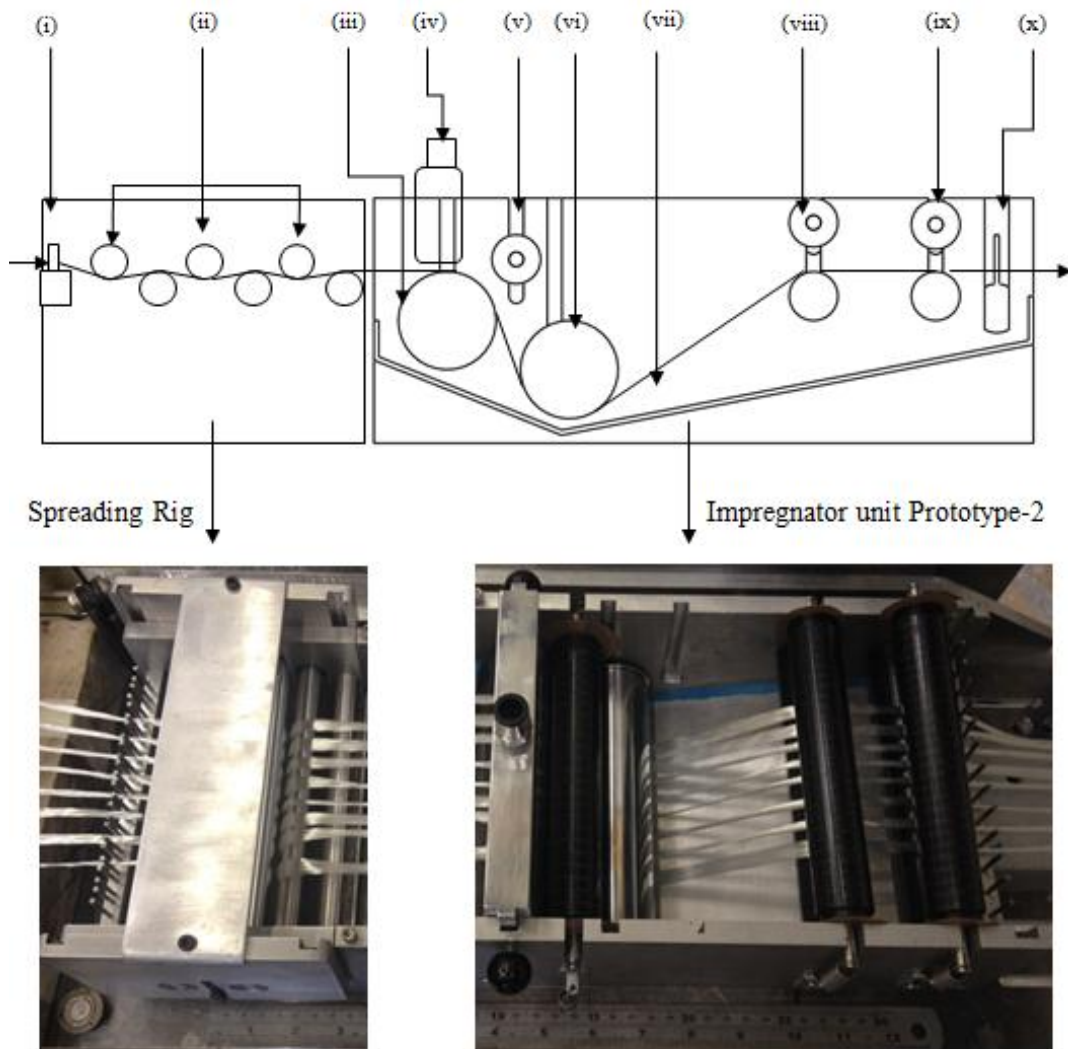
A schematic image of Prototype-2 and photographs to show manufactured components. The following components are labelled (i) Guide pins, (ii) 5 spreading rollers, (iii) 1st roller, (iv) Injector head, (v) Acetyl roller, (vi) Pin, (vii) Angled base plate, (viii) Pinch pins, (ix) Guide pins, (x) D-eye.
